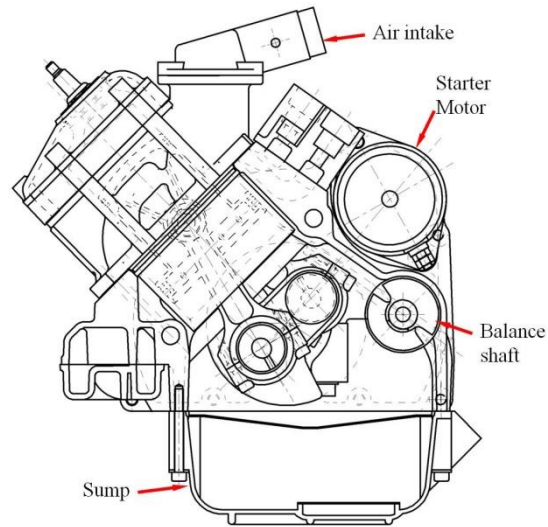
Stepped piston 290 cm<sup>3</sup> 180° parallel twin cylinder engine with counter balance shaft
